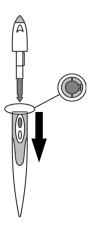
Align the blade and shaft to reassemble to stylus
